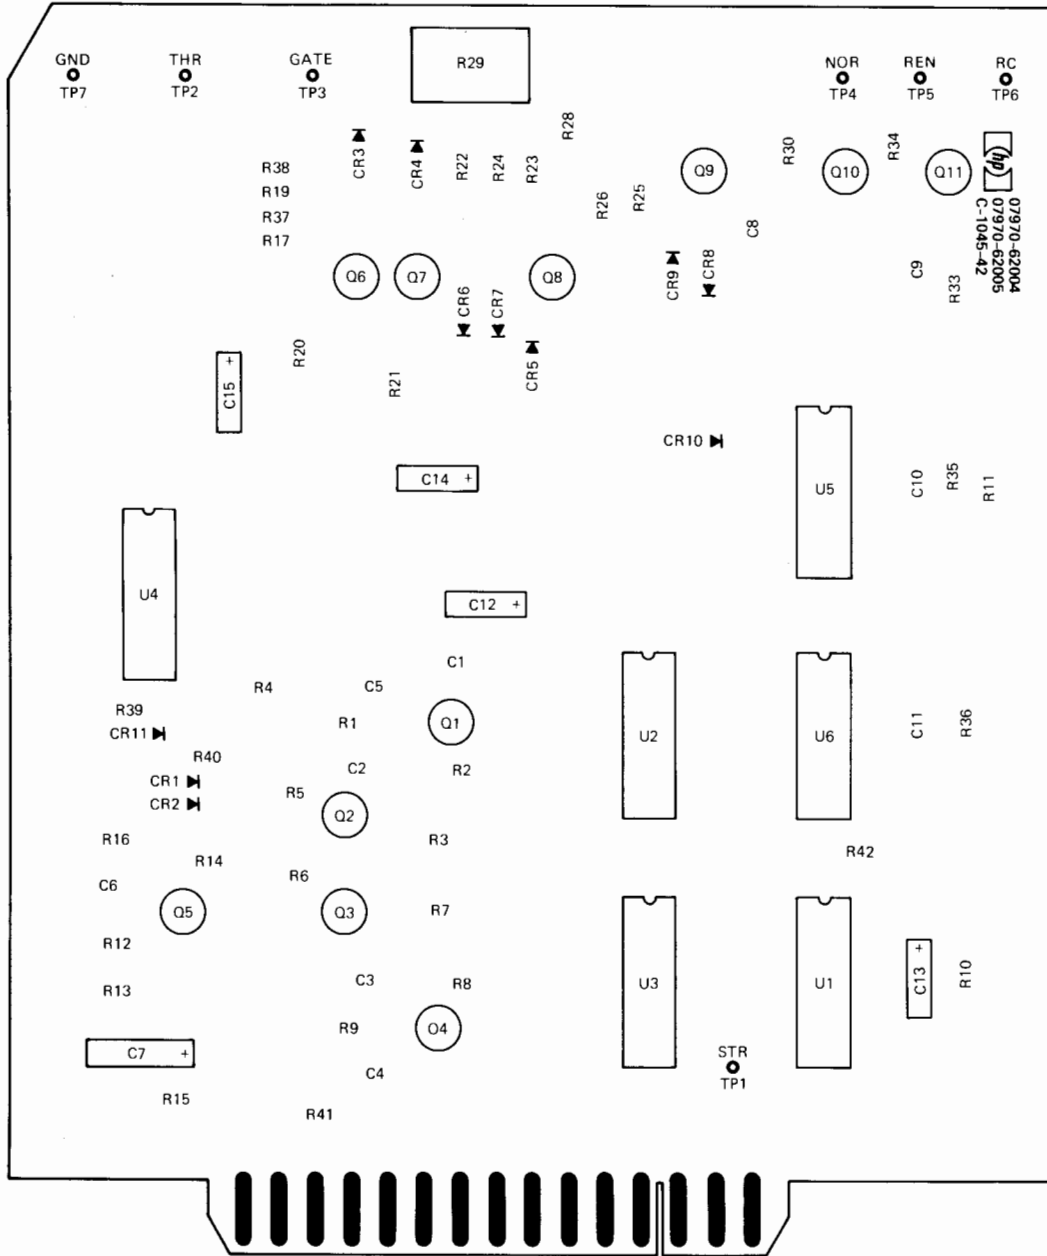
Read/Read Control PC Assembly A18A1, Parts Location Diagram
